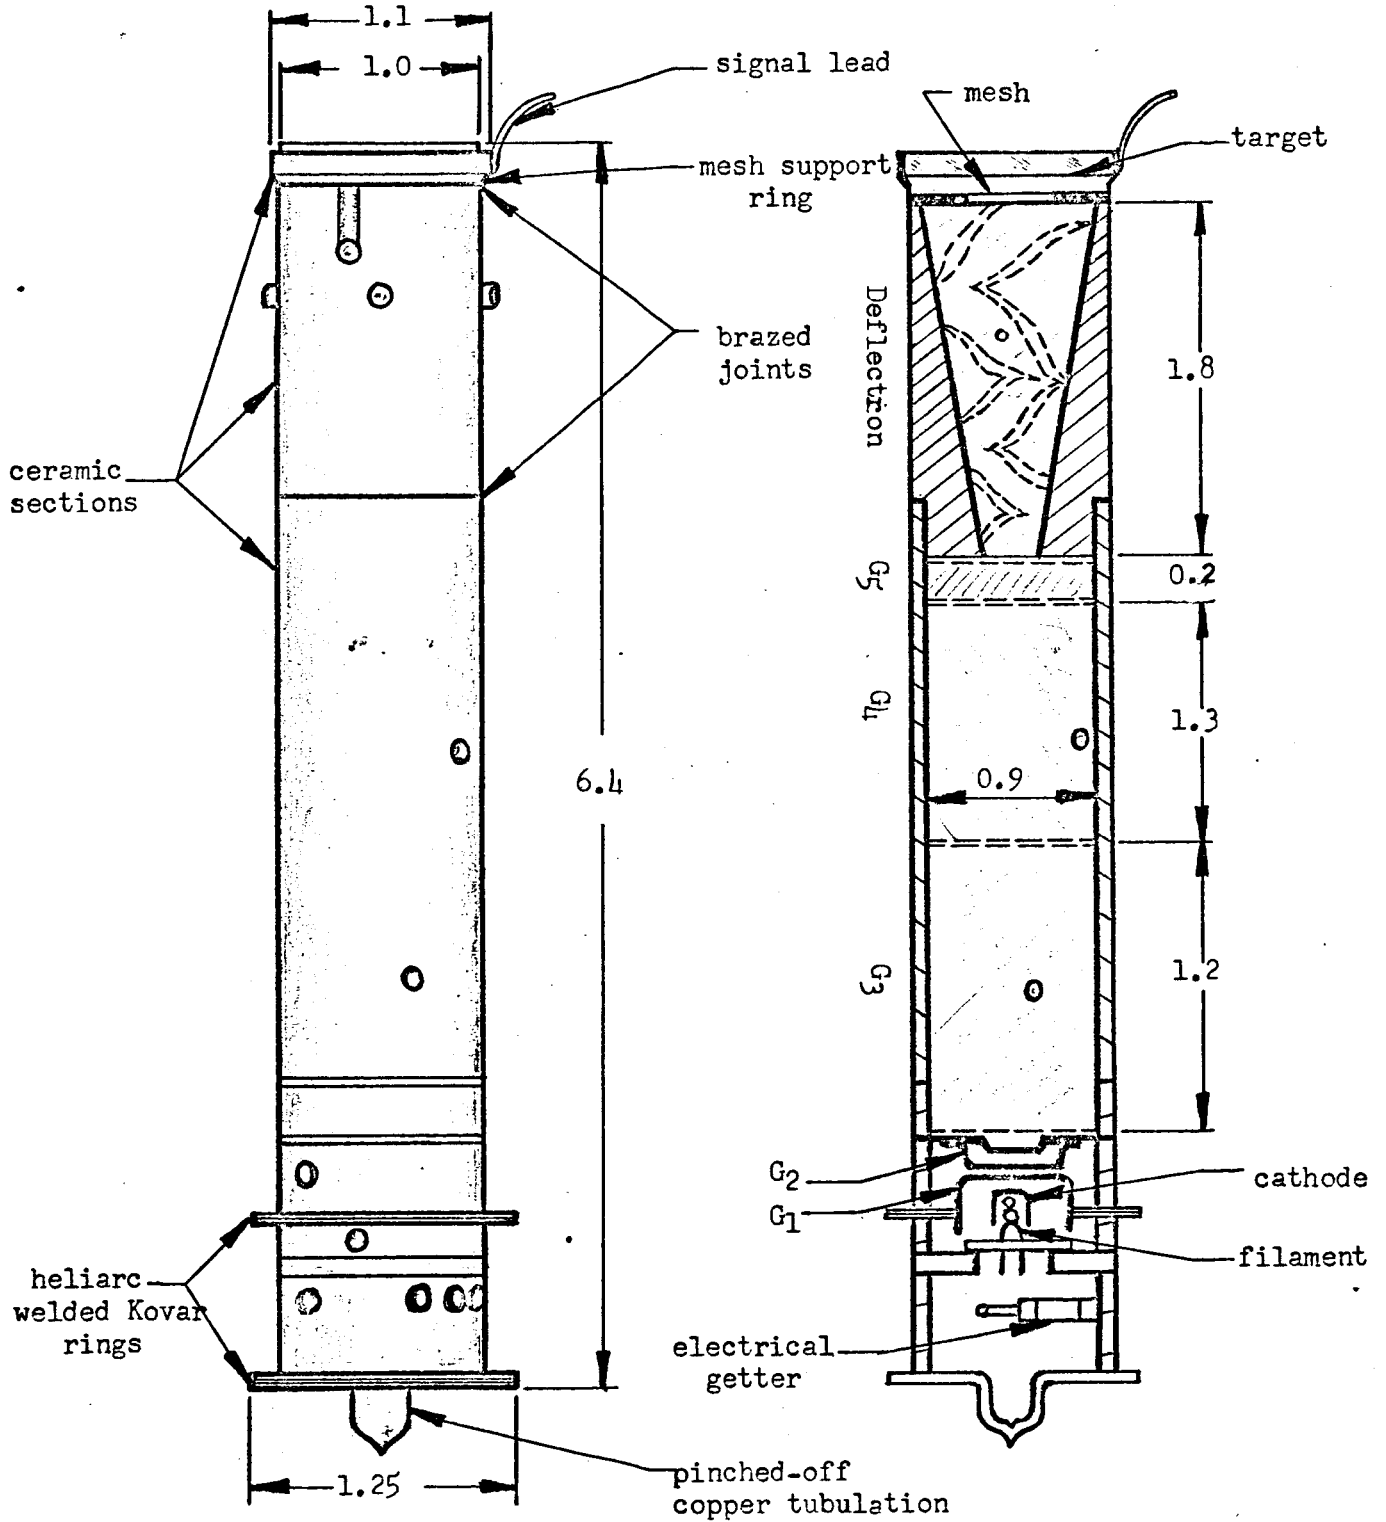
External and Cross Sectional View of Complete (Unpotted) Ceramic Vidicon
